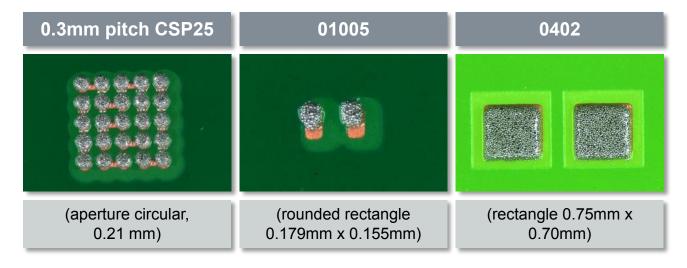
LOCTITE GC 10 produces very shiny solder joints similar to the appearance of traditional tin-lead solders.
